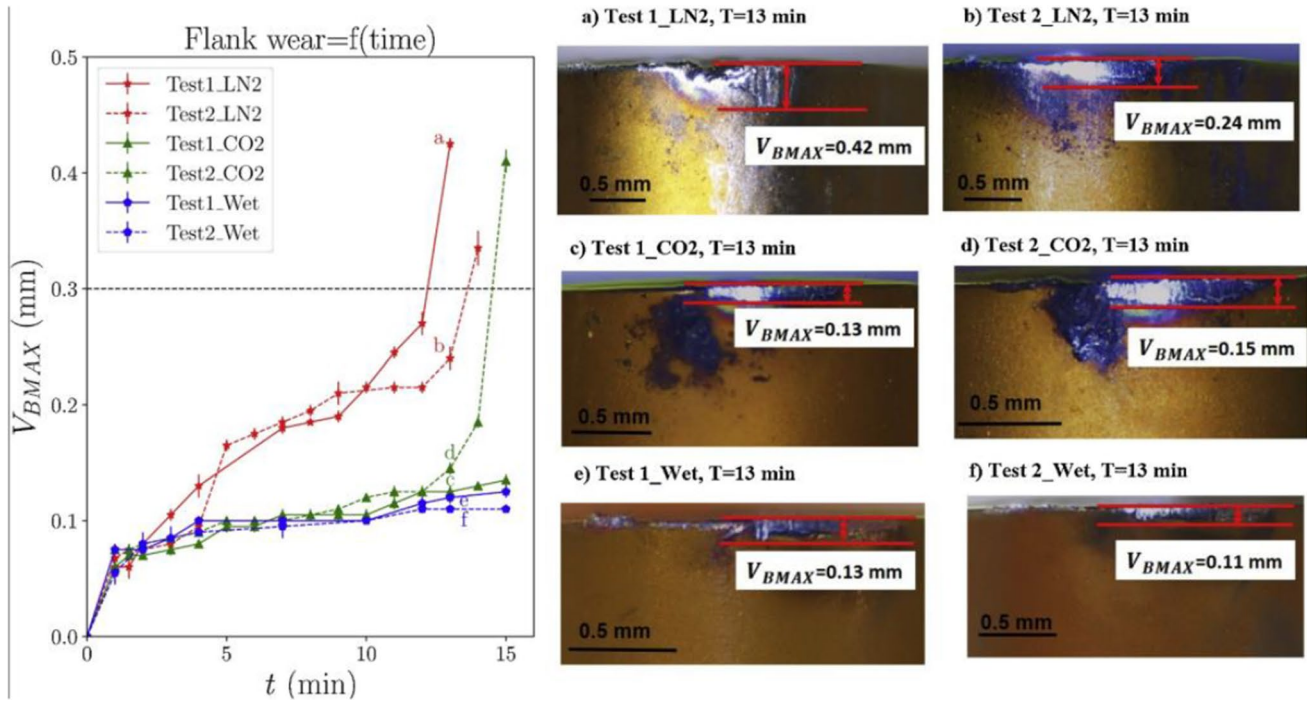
Evolution of flank wear for machining Inconel 718 with and without cryogenic cooling [53]
